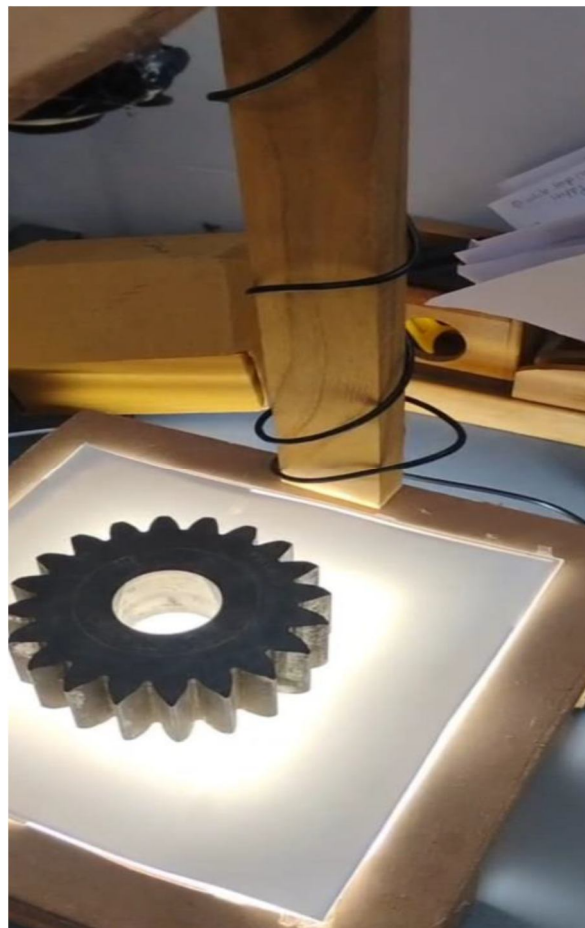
Mechanical Component (Pinion) is Placed on the Inspection Platform
